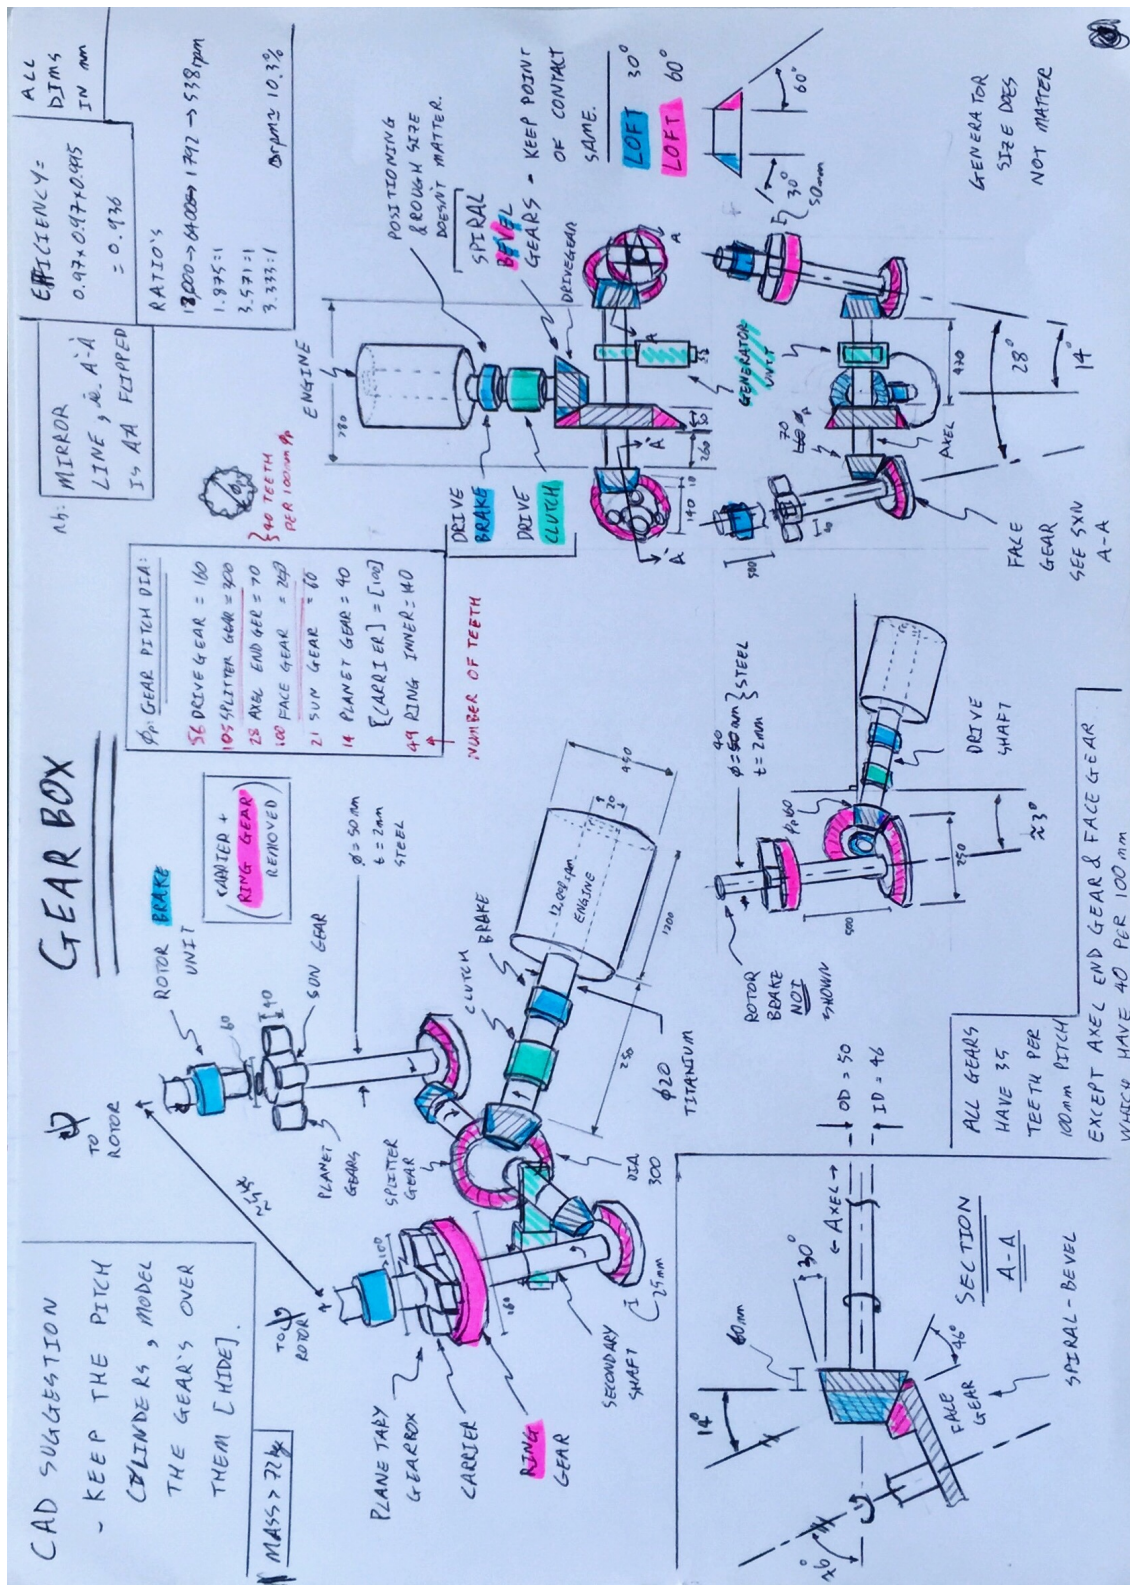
Sketch-page of the final transmission, highlighting key gear faces and components. A sectional view of the bevel/facegear interface is given.
